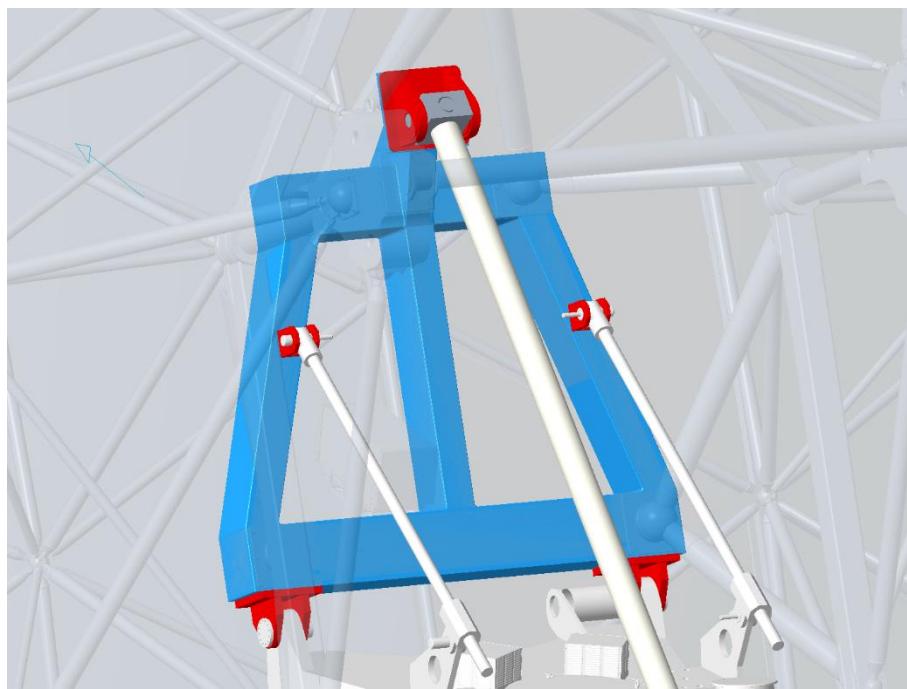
Connection between the Elevation-Turnhead Frame and the Turnhead and Ball Jackscrew
